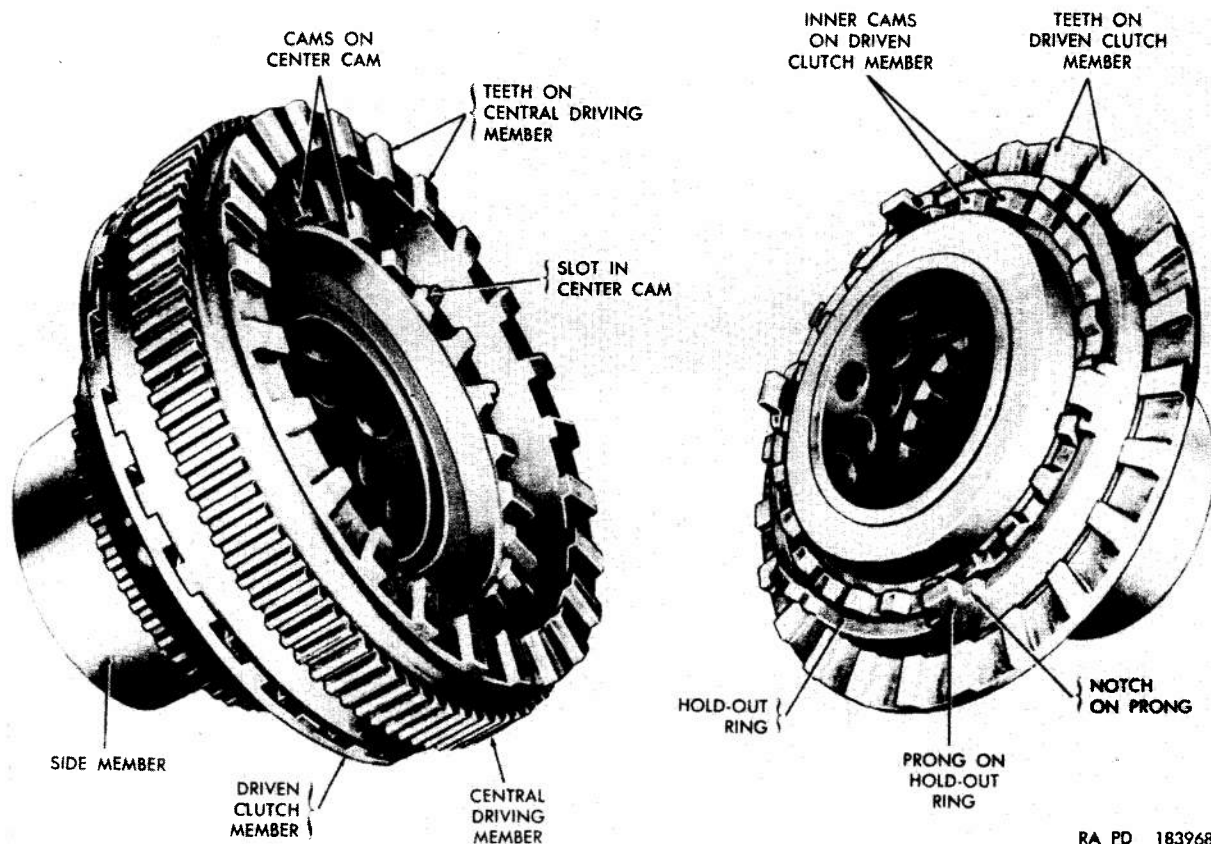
No-Spin Overrunning Clutch—Partially Disassembled View
